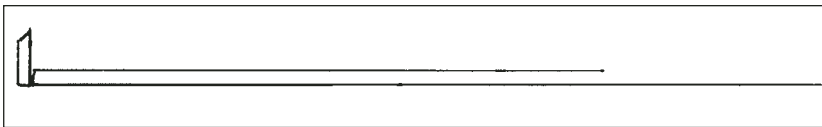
The unbeveled side of the combined strip rests on the support strip. It will be flush (and perpendicular) to one edge of the support strip
